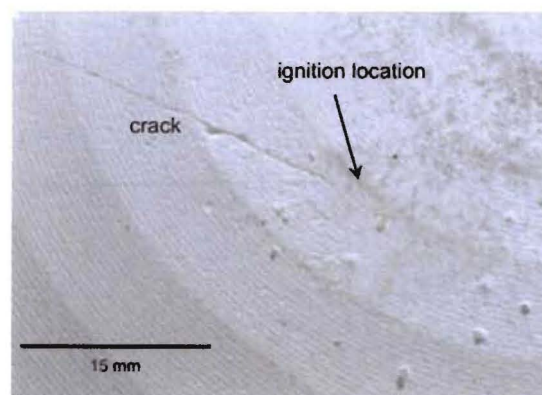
Detailed view of ignition site showing embedded grit and cracking.
